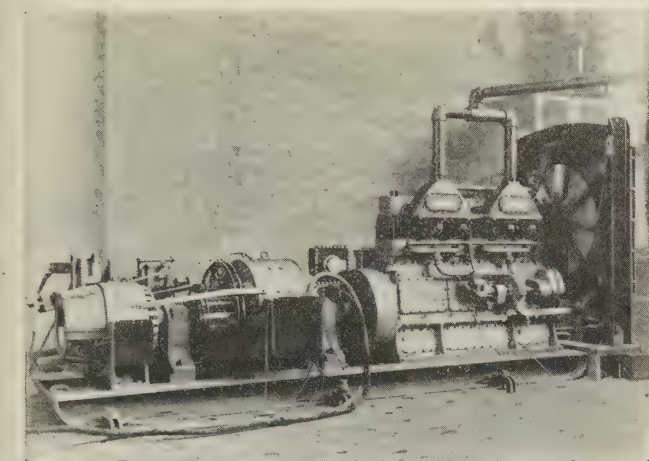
PORTABLE DIESEL ENGINE-DRIVEN SET FOR VARIABLE VOLTAGE OIL WELL DRILLING OUTFITS (SHOP VIEW)
